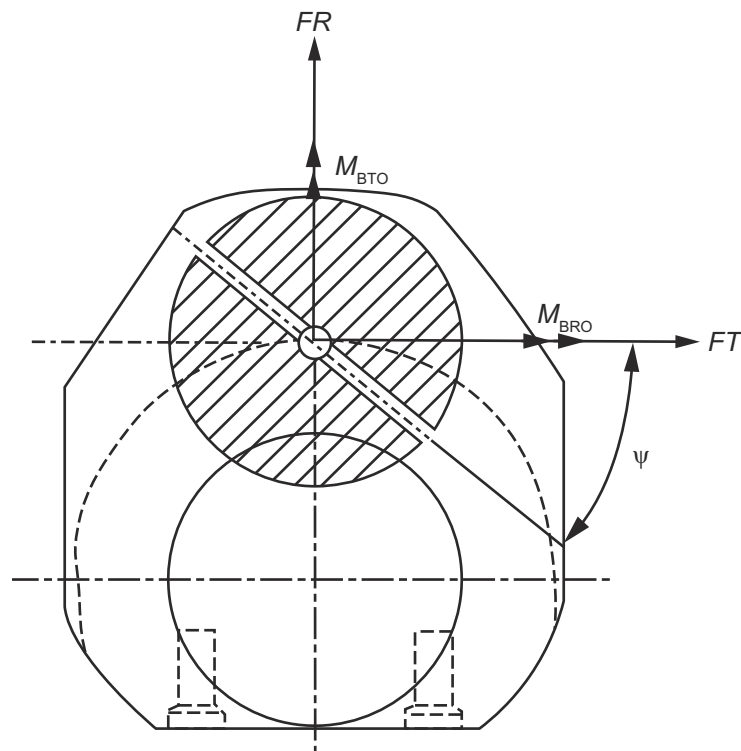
Crank dimensions for overlapped crankshaft
